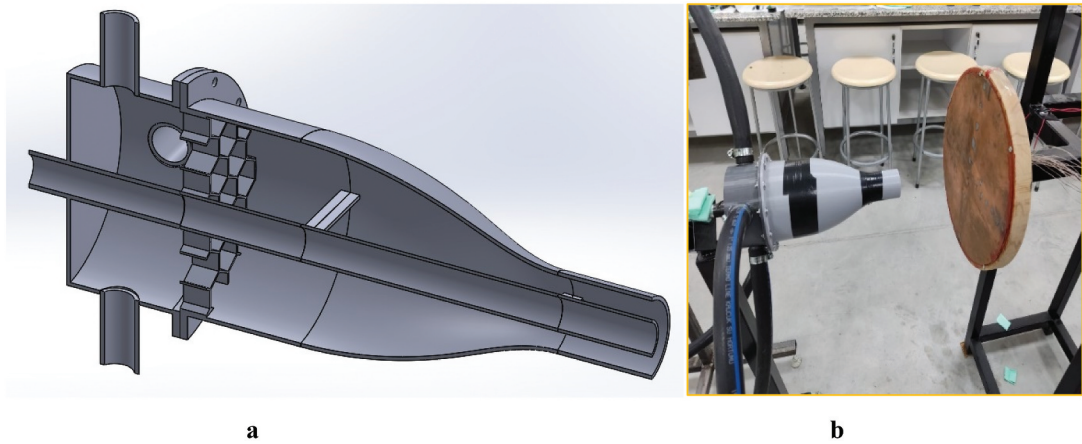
a) Cross-sectional view of the nozzle, b) Nozzle and target surface view.
